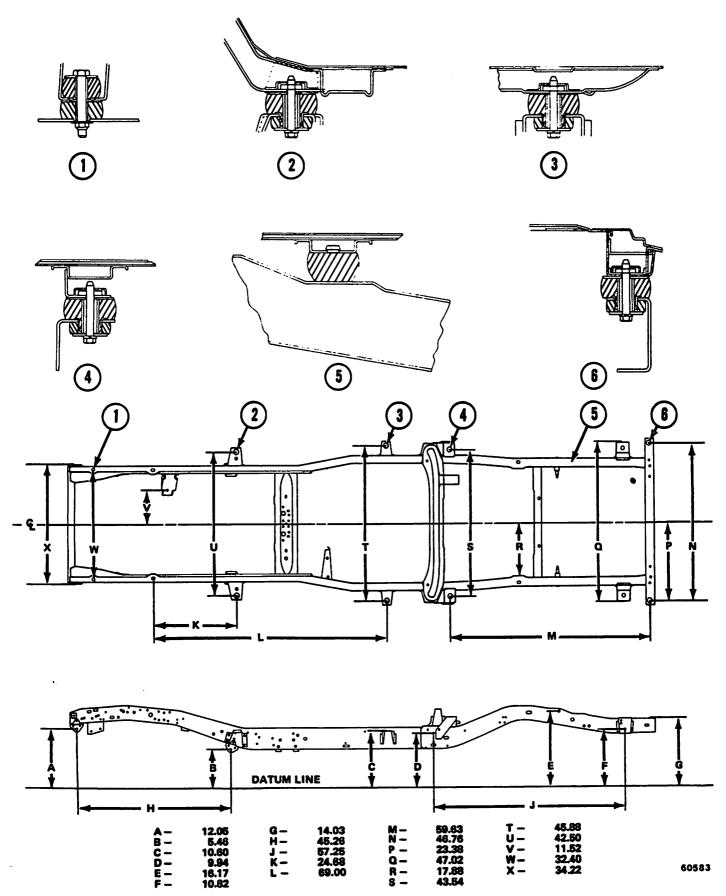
F-3 Cherokee and Wagoneer Frame Dimensions (Inches)
